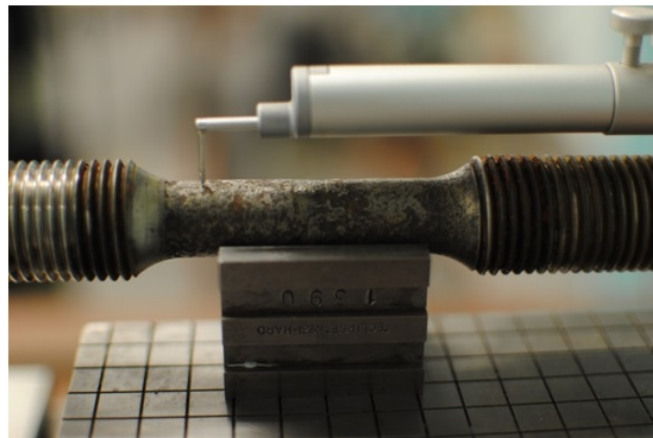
Surface roughness measurement of corroded 4330 tangentially blended fillet fatigue specimen - Measurements obtained using Mitutoyo Surftest SV-2000.
